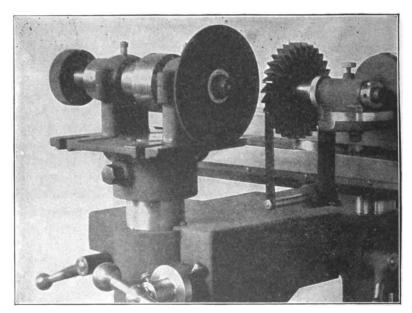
Sharpening peripheral. A side milling cutter with a disk wheel.
